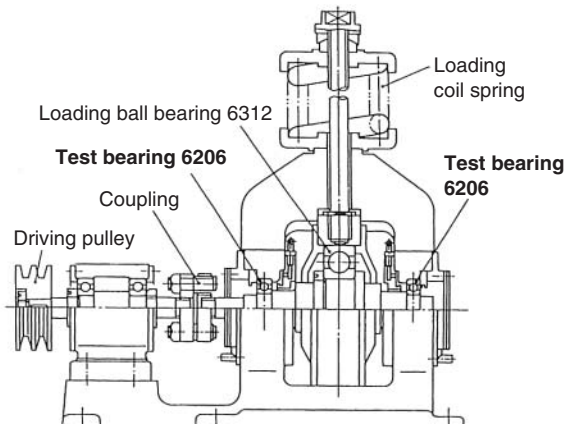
NTN rolling contact fatigue test rig for ball bearing
